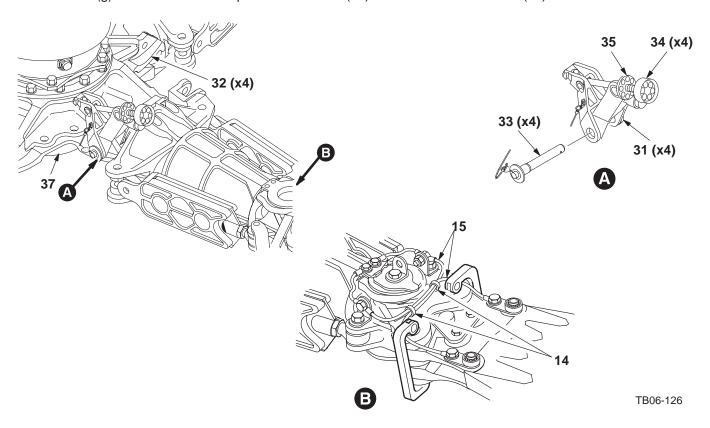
Flap Lock Assembly on Main Rotor Hub Assembly
